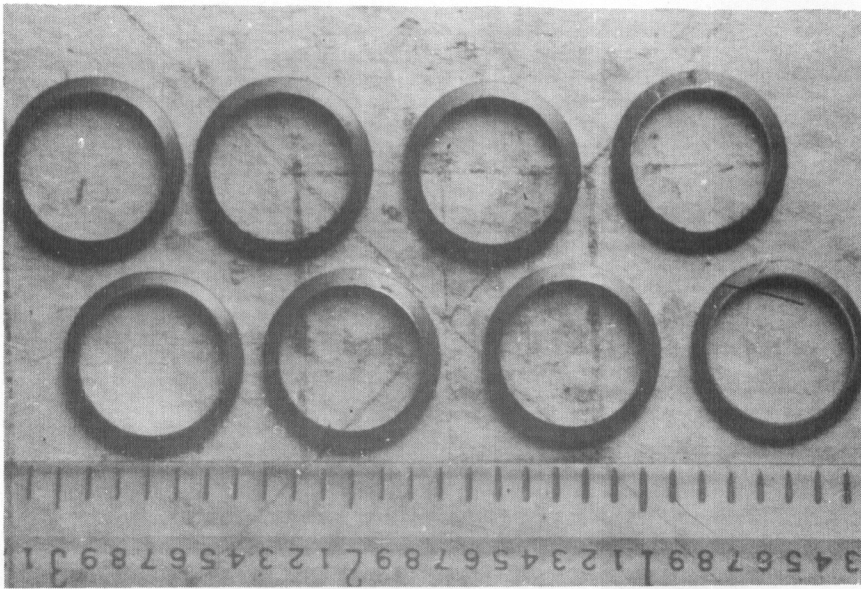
THE DASH FIVE METAL RINGS USED IN THIS PROGRAM
